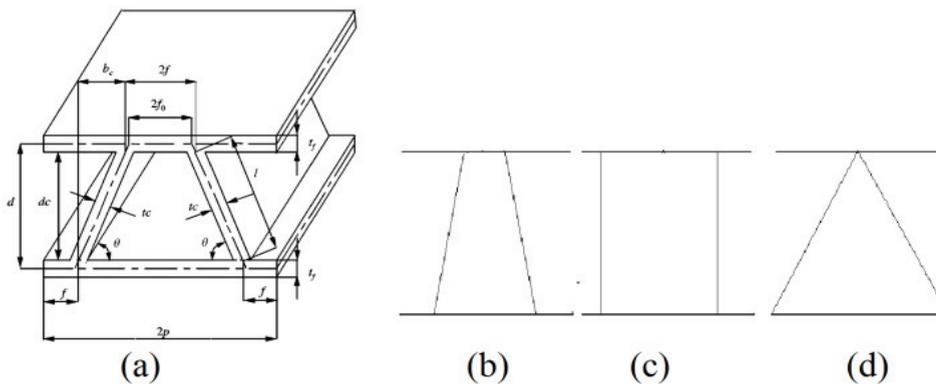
(a) Dimension of a truss core unit cell [3]. Different topology of truss core sandwich panel, (b) trapezoidal truss core, (c) cellular truss core, and (d) triangular truss core
